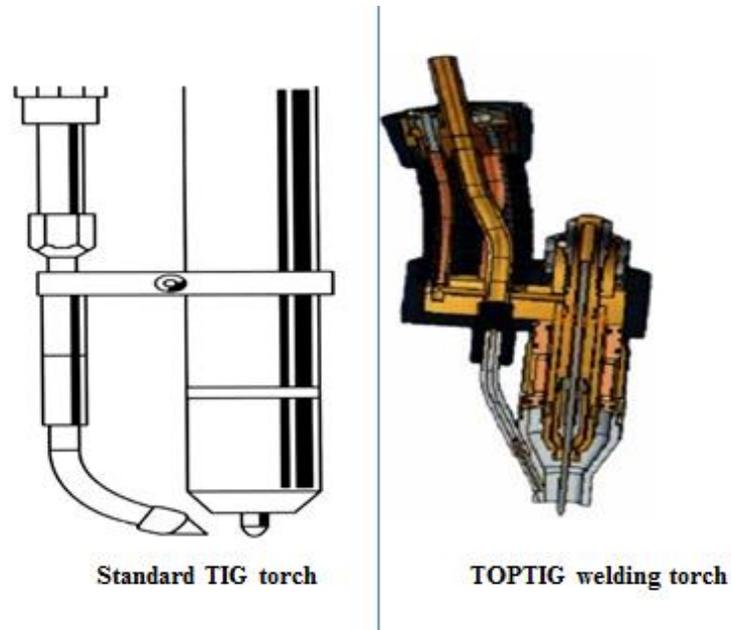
Standard TIG torch as compared to the cross section of TOP TIG welding torch [100]
